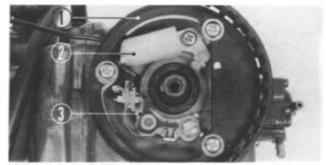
① Advancer case ② Contact breaker ② Condenser
